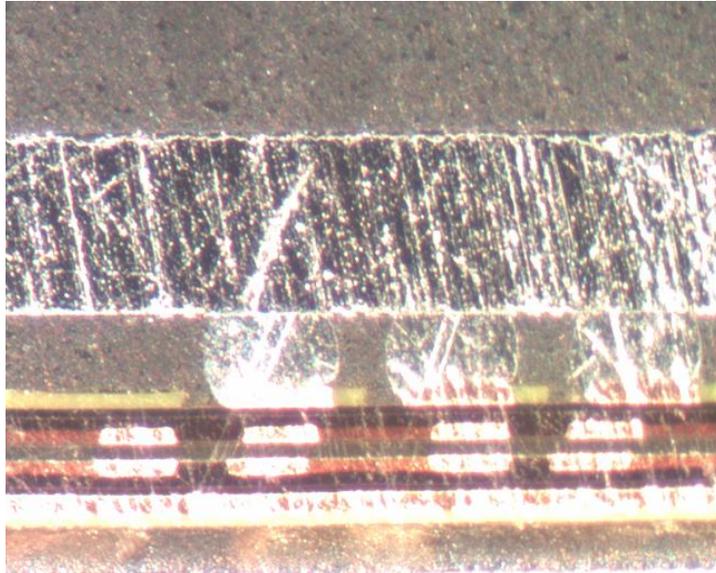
Epoxy Test Board Showing CSP Surface Cracking, 1200 Cycles
